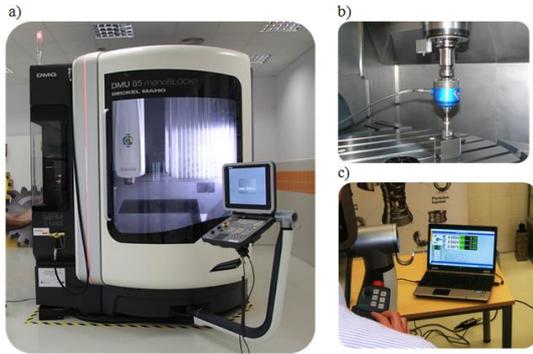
Test object: a) vertical 5-axis machining centre DMU 65 MonoBlock by DMG company, b) R-Test measuring system by IBS Precision Engineering, mounted on the machine tool, c) computer operating MTS-003 software.
